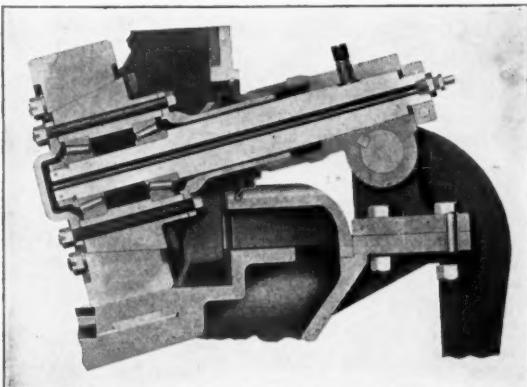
Sectional view of the Lehigh air separator pulverizing mill. The oiling system involves an oil pump "G", driven by a chain from the main driving shaft "HA". As oil is discharged through a strainer it passes to the upper and lower main shaft bearings. The connection to the upper bearing is through an oil riser. This latter in turn is connected to the upper main shaft bearing by tube "N" which has a sight feed indicator in the line to the gear and pinion teeth, and to the oil seal in the end cover "PA" on the pinion shaft.
